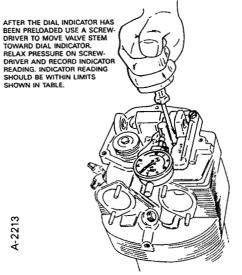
Dial Indicator in Position to Check Valve Guide Clearance
